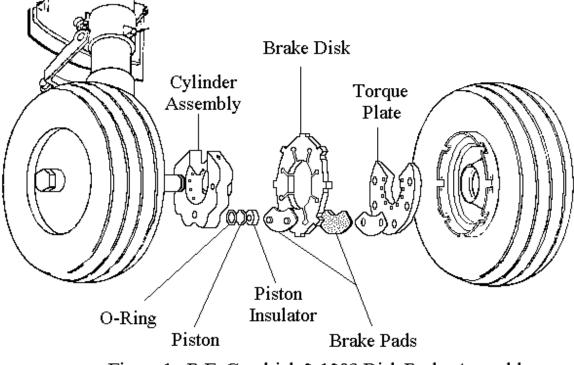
B.F. Goodrich 2-1203 Disk Brake Assembly
